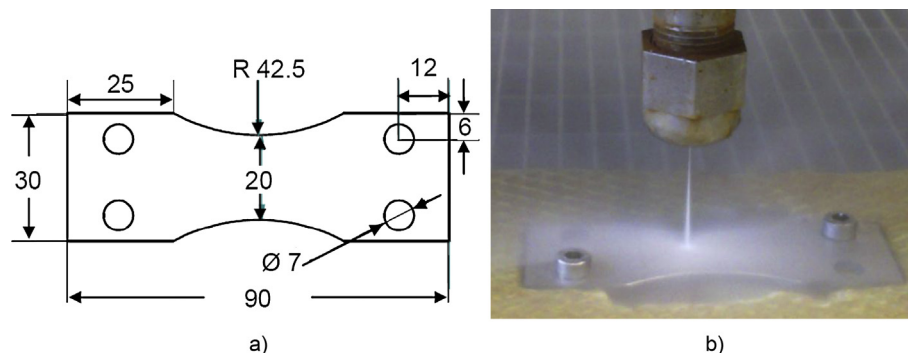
(a) Schematic drawing of the fatigue test specimen (all dimensions are in millimetres), (b) waterjet peening of fatigue specimen.
